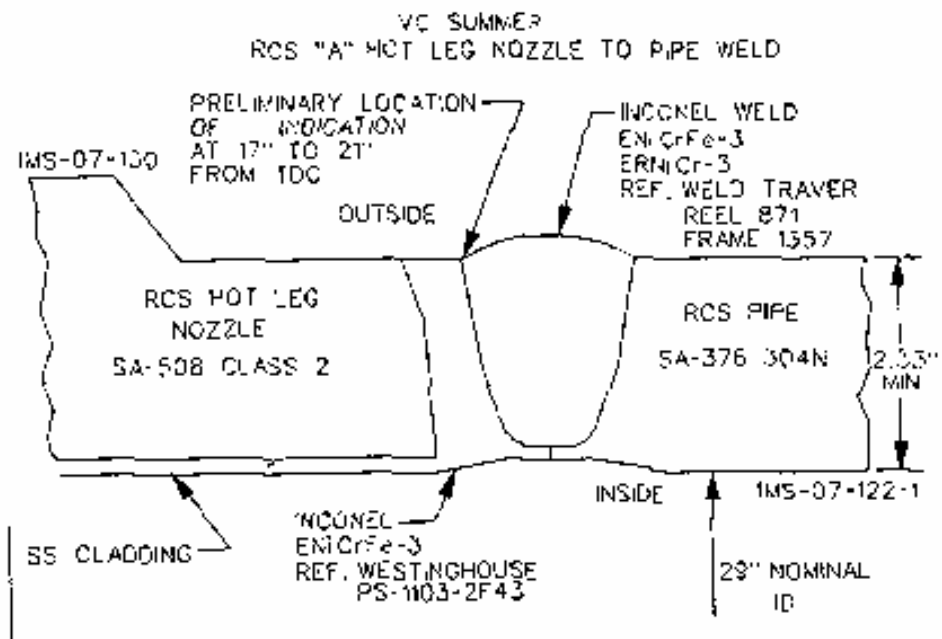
Geometry of V.C. Summer bi-metallic weld joint
